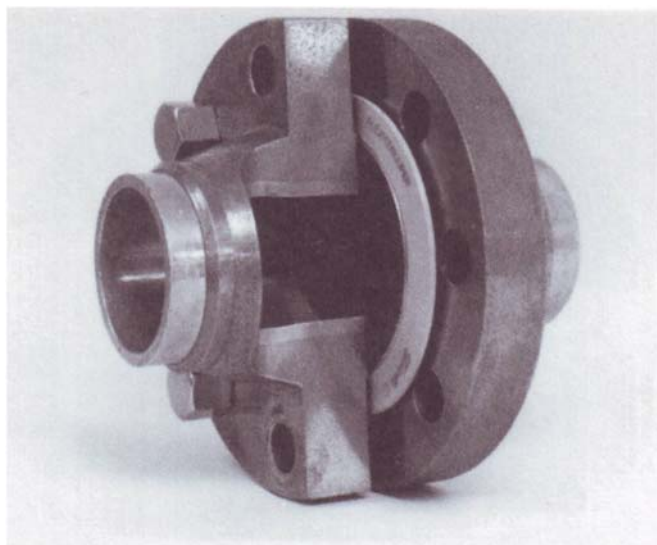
Flat ring gasket and flange. Courtesy of Flexitallic, Inc.
